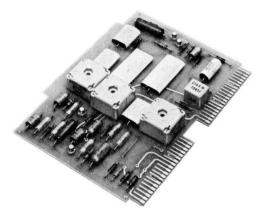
Typical 8-Inch 80-Contact 400-Series KTU
